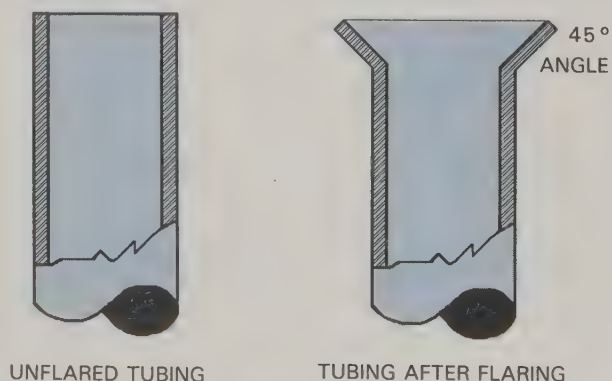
When copper tubing is flared, the tubing end is expanded to a funnel shape. The 45° angle matches the angle used on flare fittings.
